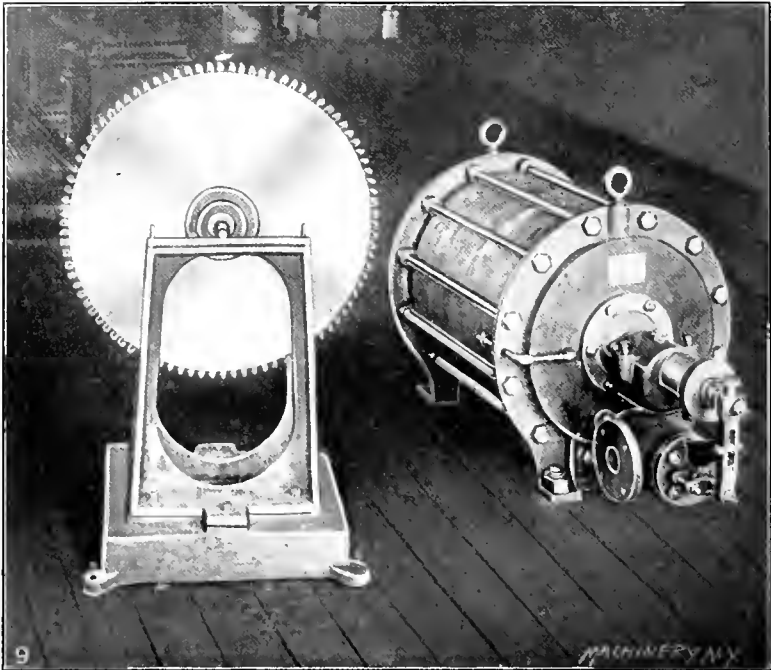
Balancing Disk on Knife-edge Bearing Ways.
